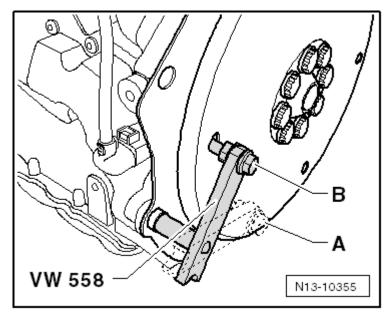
Identifying Flywheel Lock Adapter -VW 558- Installed To Cylinder Block And Drive Plate Courtesy of VOLKSWAGEN UNITED STATES, INC.
